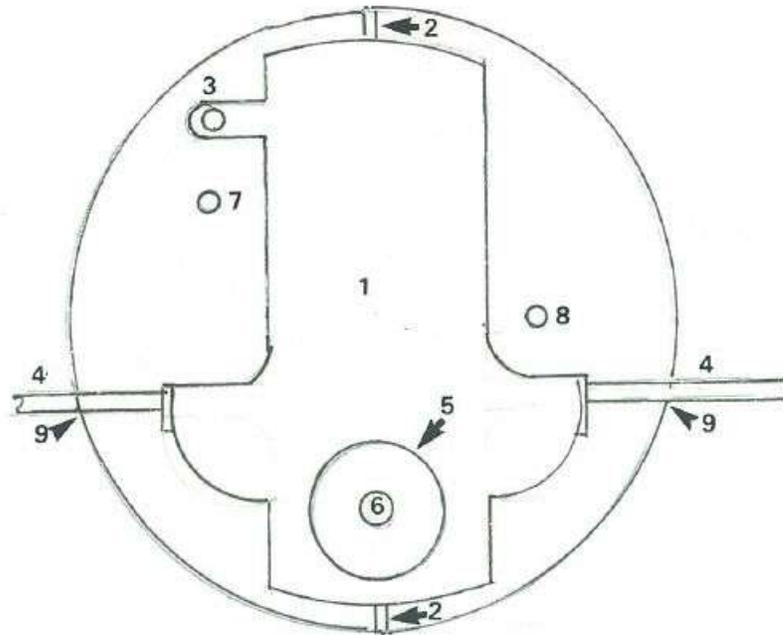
TOP VIEW OF STBD. SIDE (Ref. Details "A" & "B")
